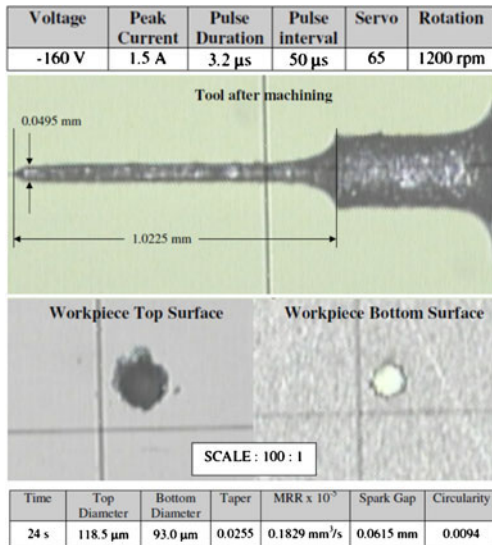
Fabrication of 50 μm electrode with 1,000 μm length (a.r. 20) using block-μEDM process and fabricated micro-holes in silicon workpiece
